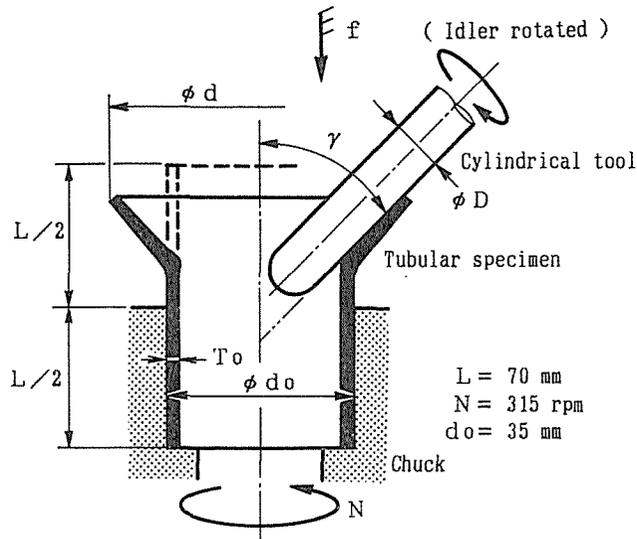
Orbital rotary flaring with a cylindrical tool.
